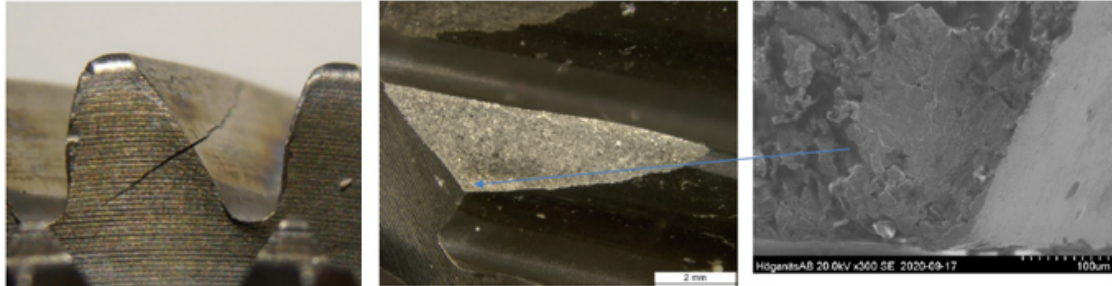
Tooth breakage of asymmetric rolled PM gear with ground coast flanks after 1,5 hours.
